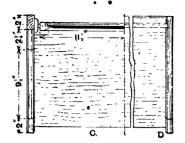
Part Horizontal Section of Shaving Pedestal.
